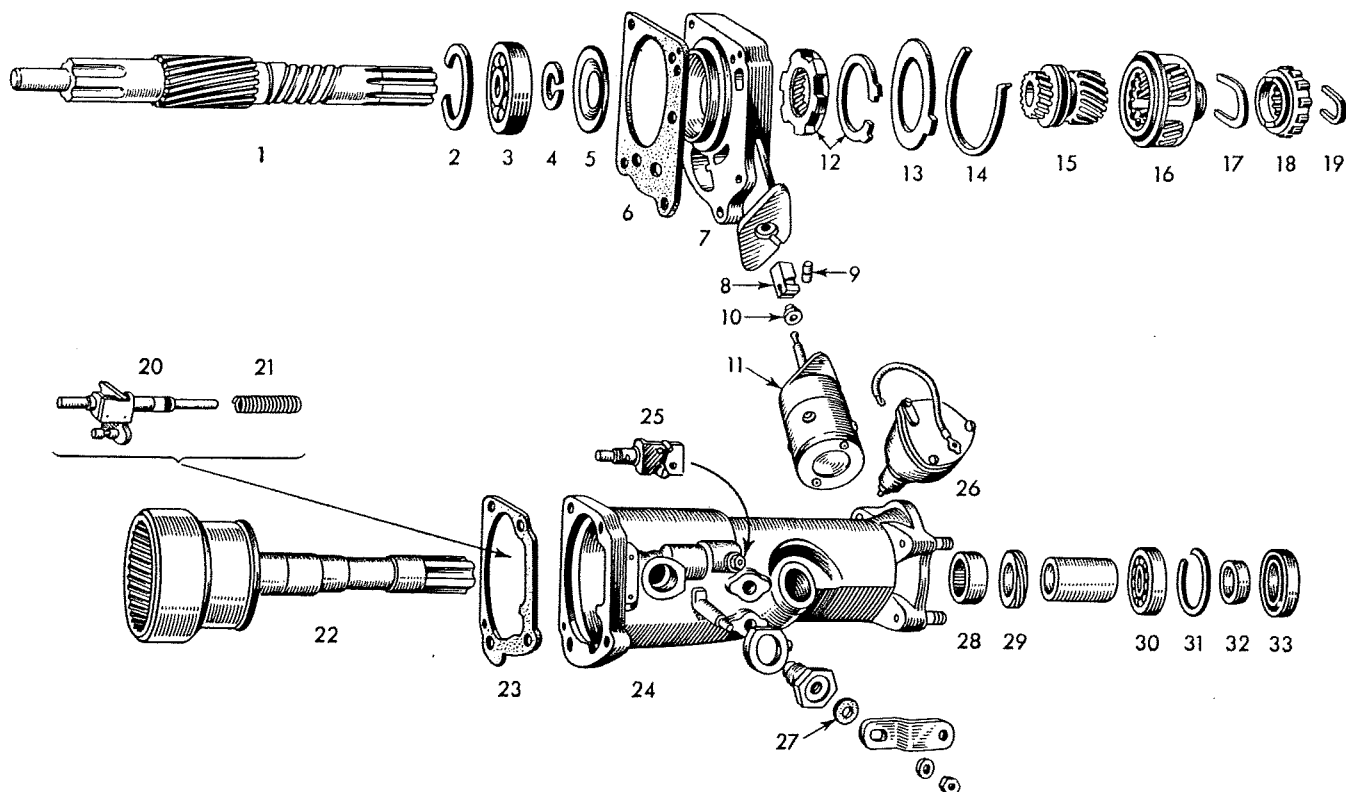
Group No. 9. Overdrive on Lincoln-Zephyr
